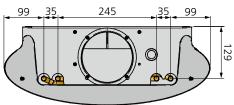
Dimensions ADRIATIC AWC Ellips, end view water connection
